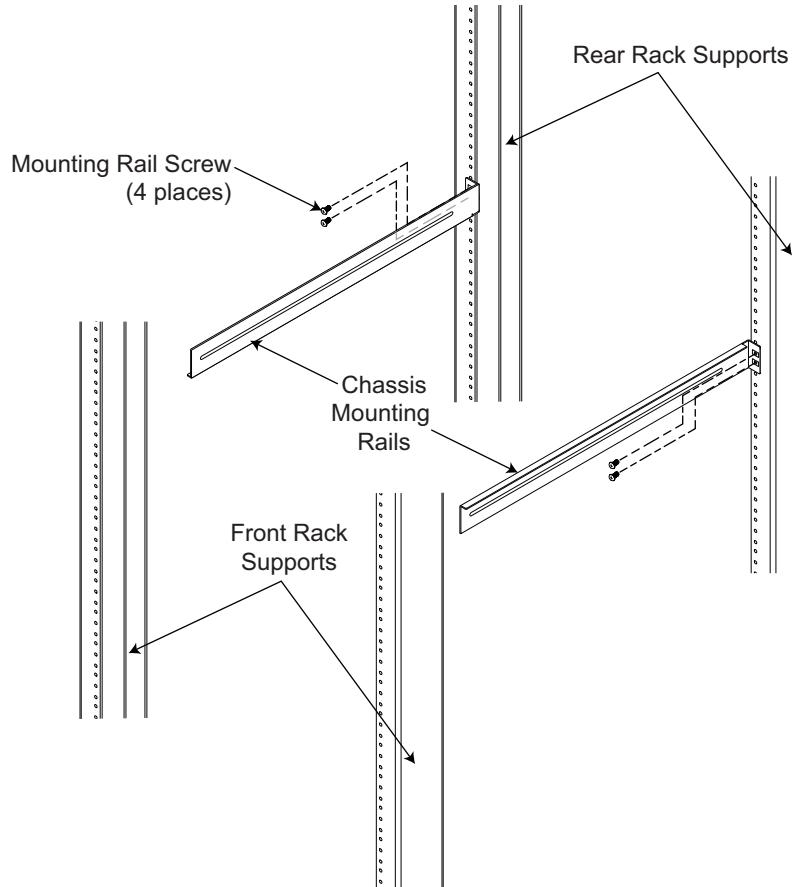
Attaching the Chassis Mounting Rails to the Rear Rack Supports (Inside Mount)
